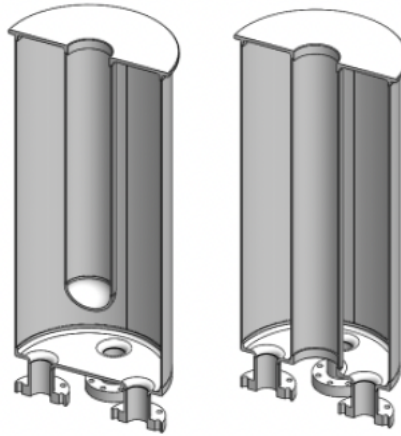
Cut out view of QWR (left) and HWR (right)
